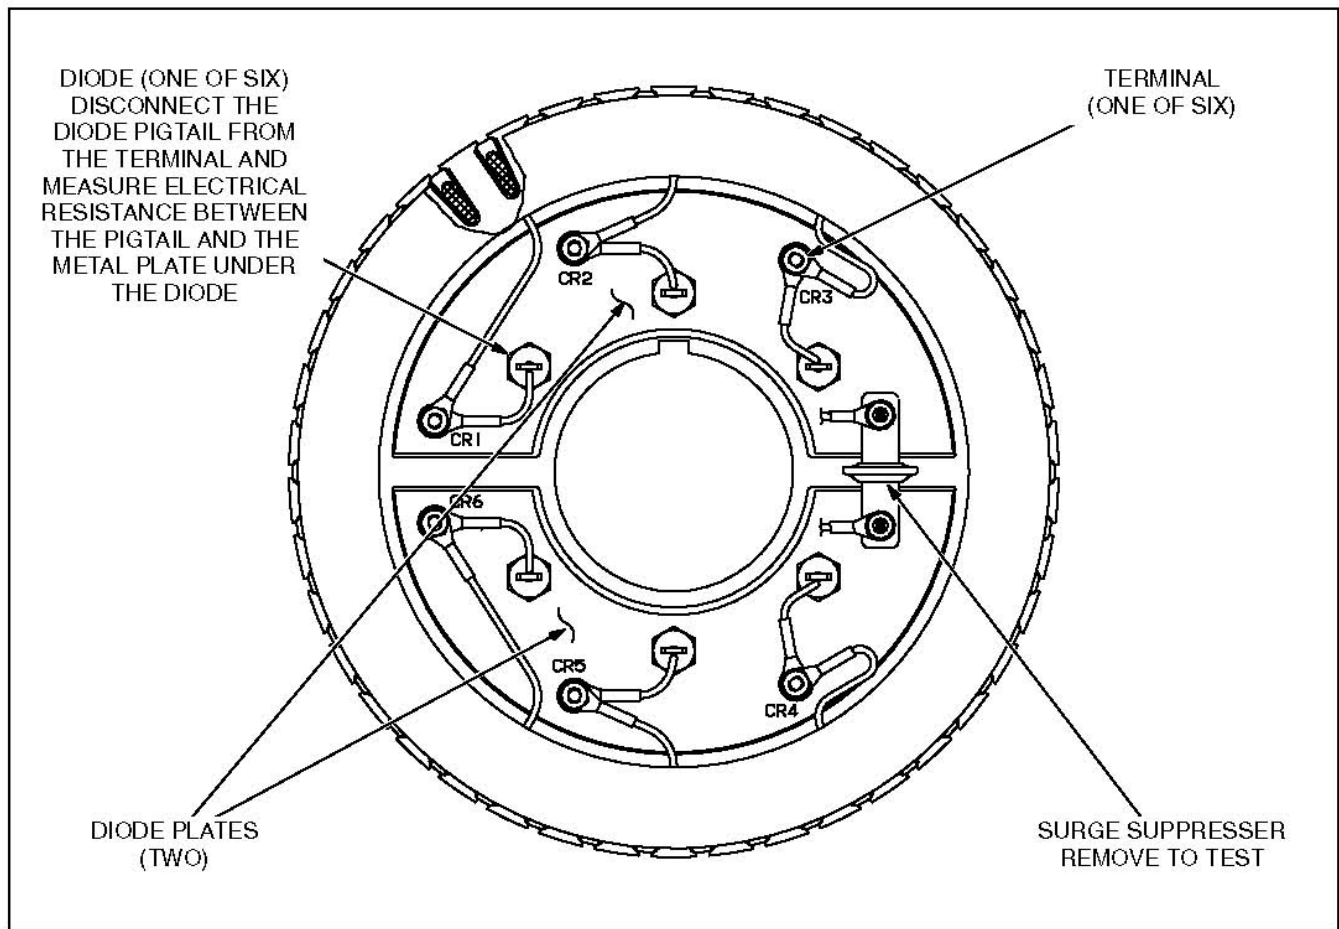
TESTING THE ROTATING RECTIFIER ASSEMBLY
